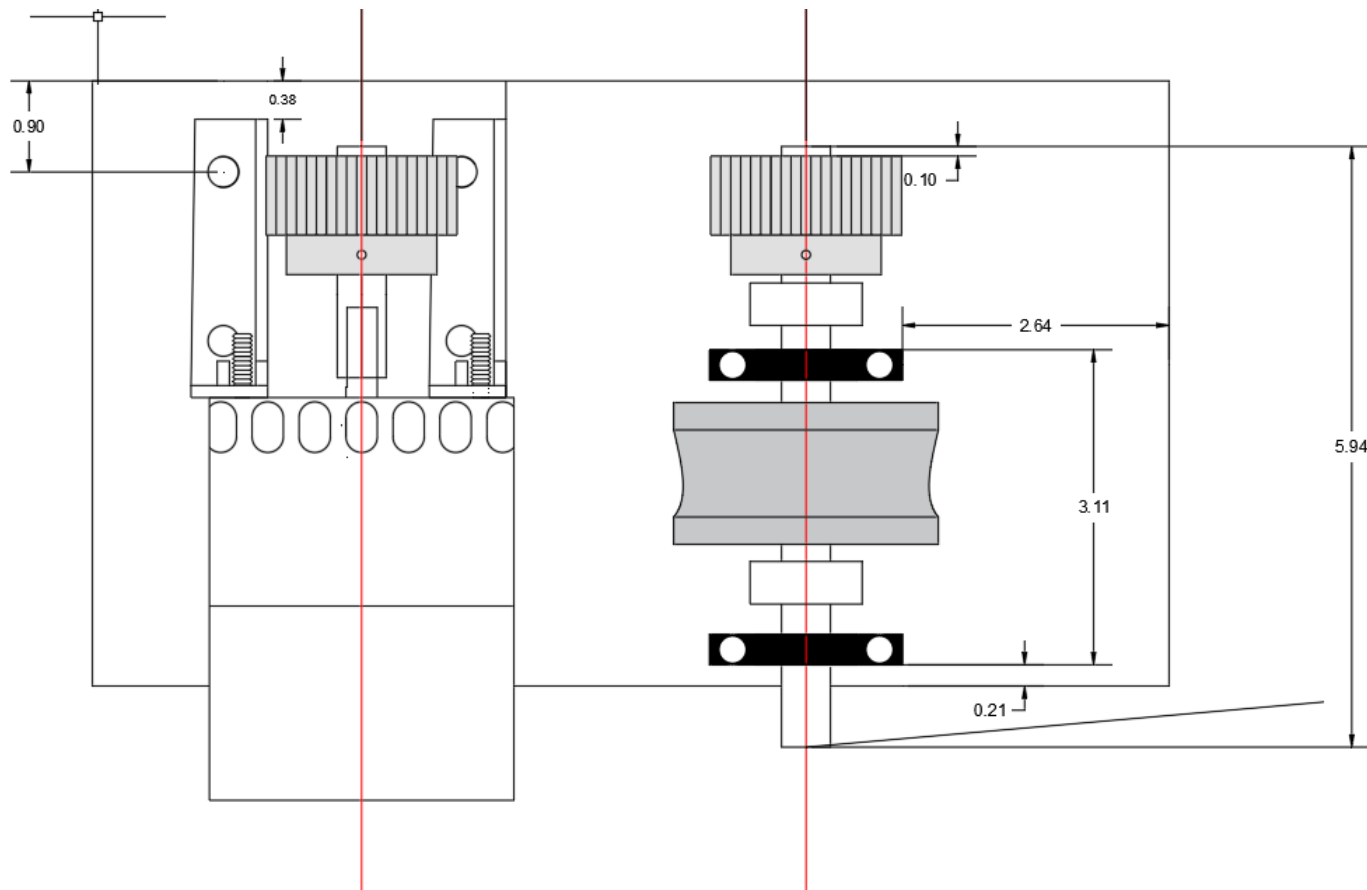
Driver Mechanism for the Lid Driven Cavity Flow, Top View
